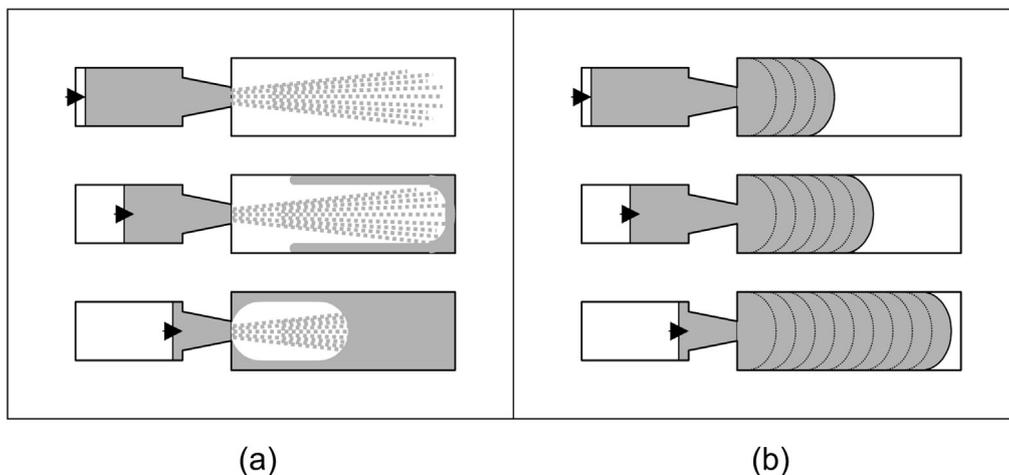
Schematic illustrating metal flow in (a) conventional die casting; and (b) indirect squeeze casting process [8].
